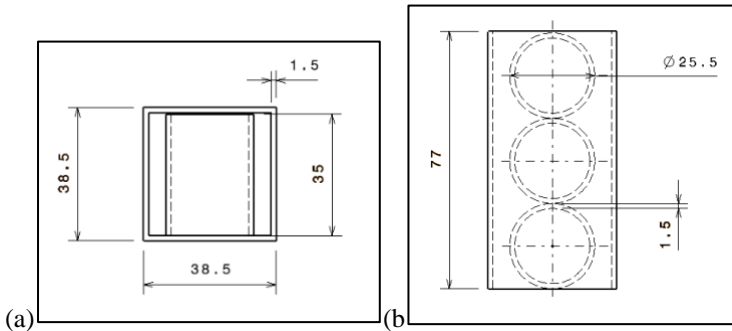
Dimension (in mm) of tubular structure with internally stacked circular rings ; (a) Top View, (b) Front View
